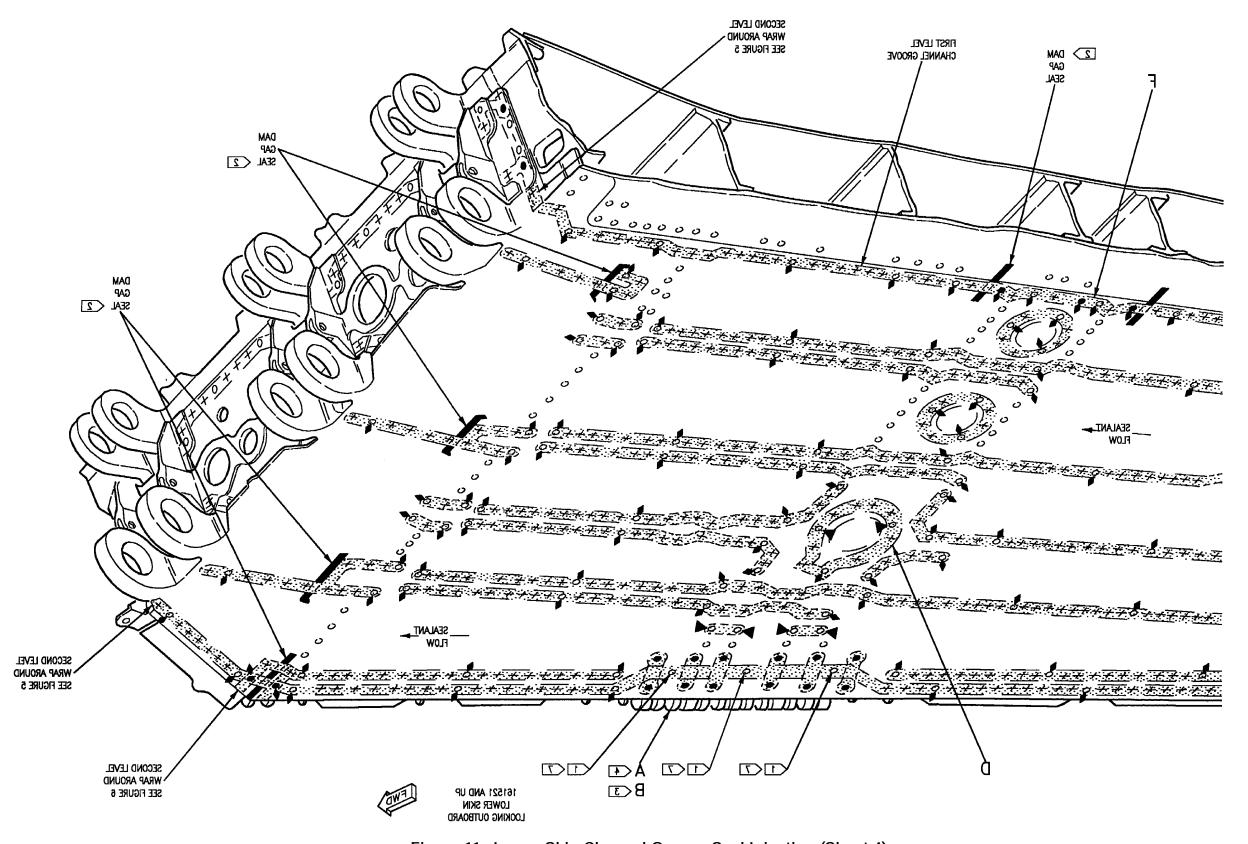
Lower Skin Channel Groove Seal Injection (Sheet 4)
